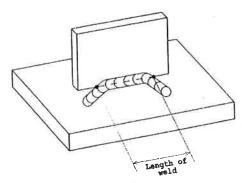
(b) When Weld Bead Deviates from Extension of Weld Line
